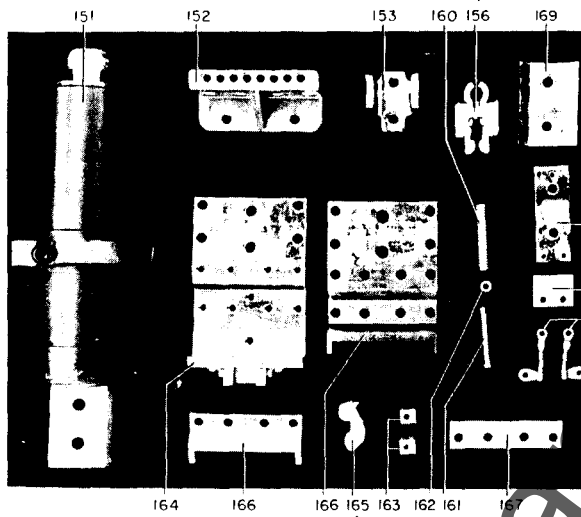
Rear Bushing Assembly (Ref. No. 150)
